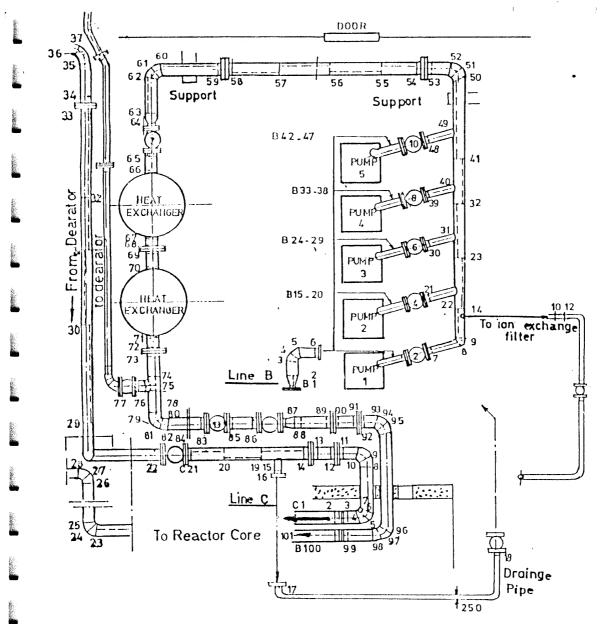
Circumpherntial and Longitud and Welding Identifications in Reactor Primary cooling System
